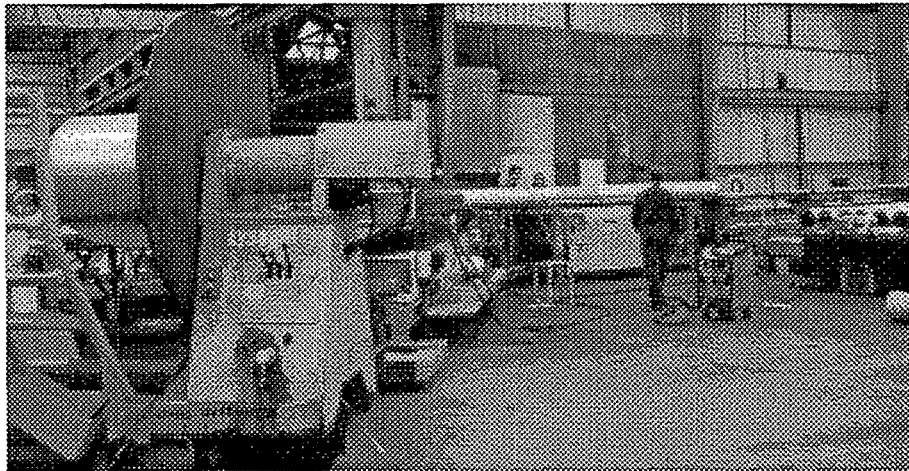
Helcor machine. Flat sheet on left enters formers then is spiral wound, seamed and the complete pipe emerges on right. An operator is standing near the saw assembly.
